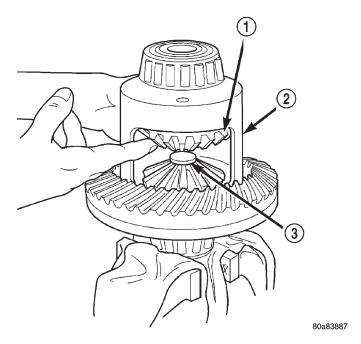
Upper Side Gear & Clutch Disc Pack Installation
